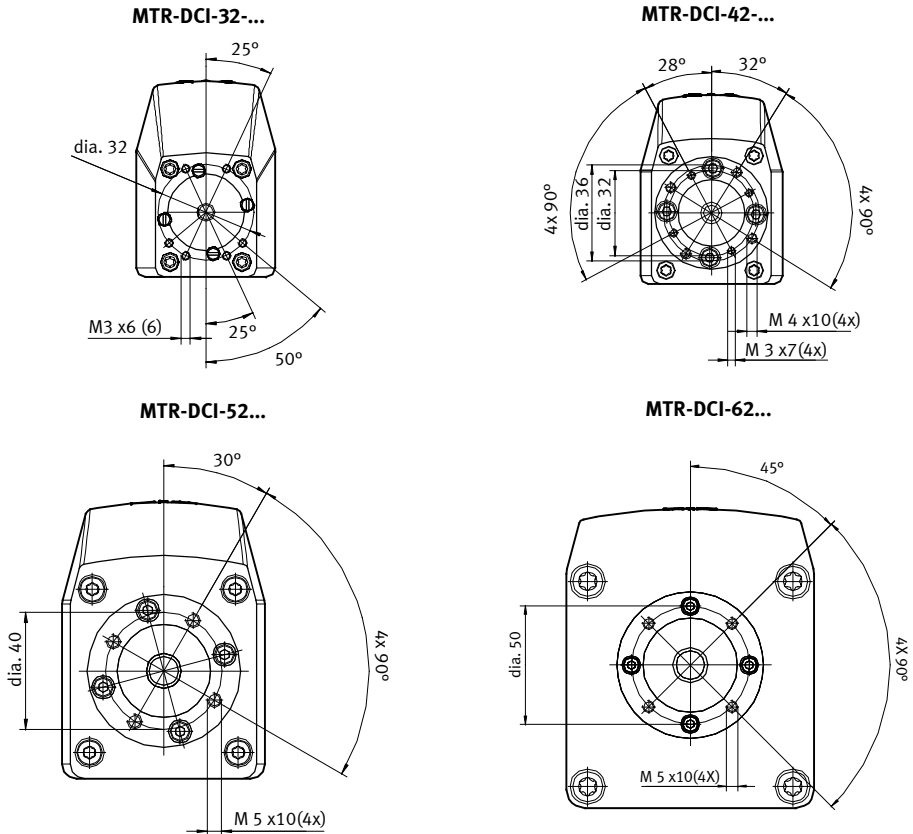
/2: Fastening the drive by means of the front threads (direct fastening)
